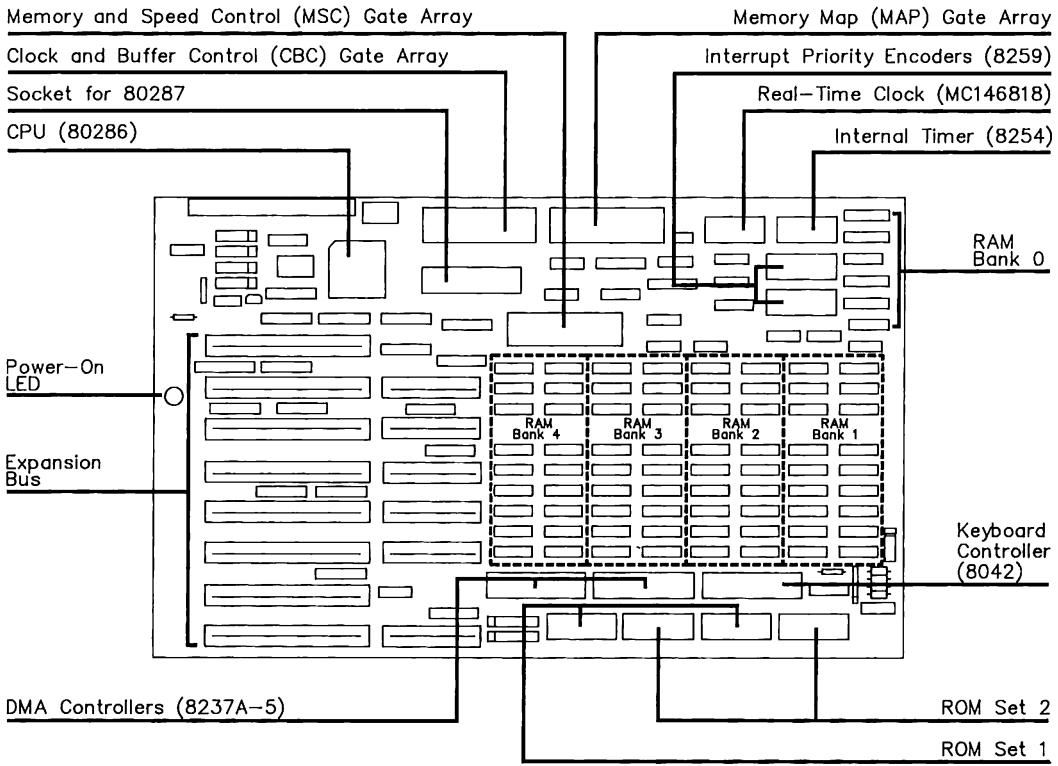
COMPAQ DESKPRO 286 Version 2 System Board Component Layout (Page 1 of 1)
